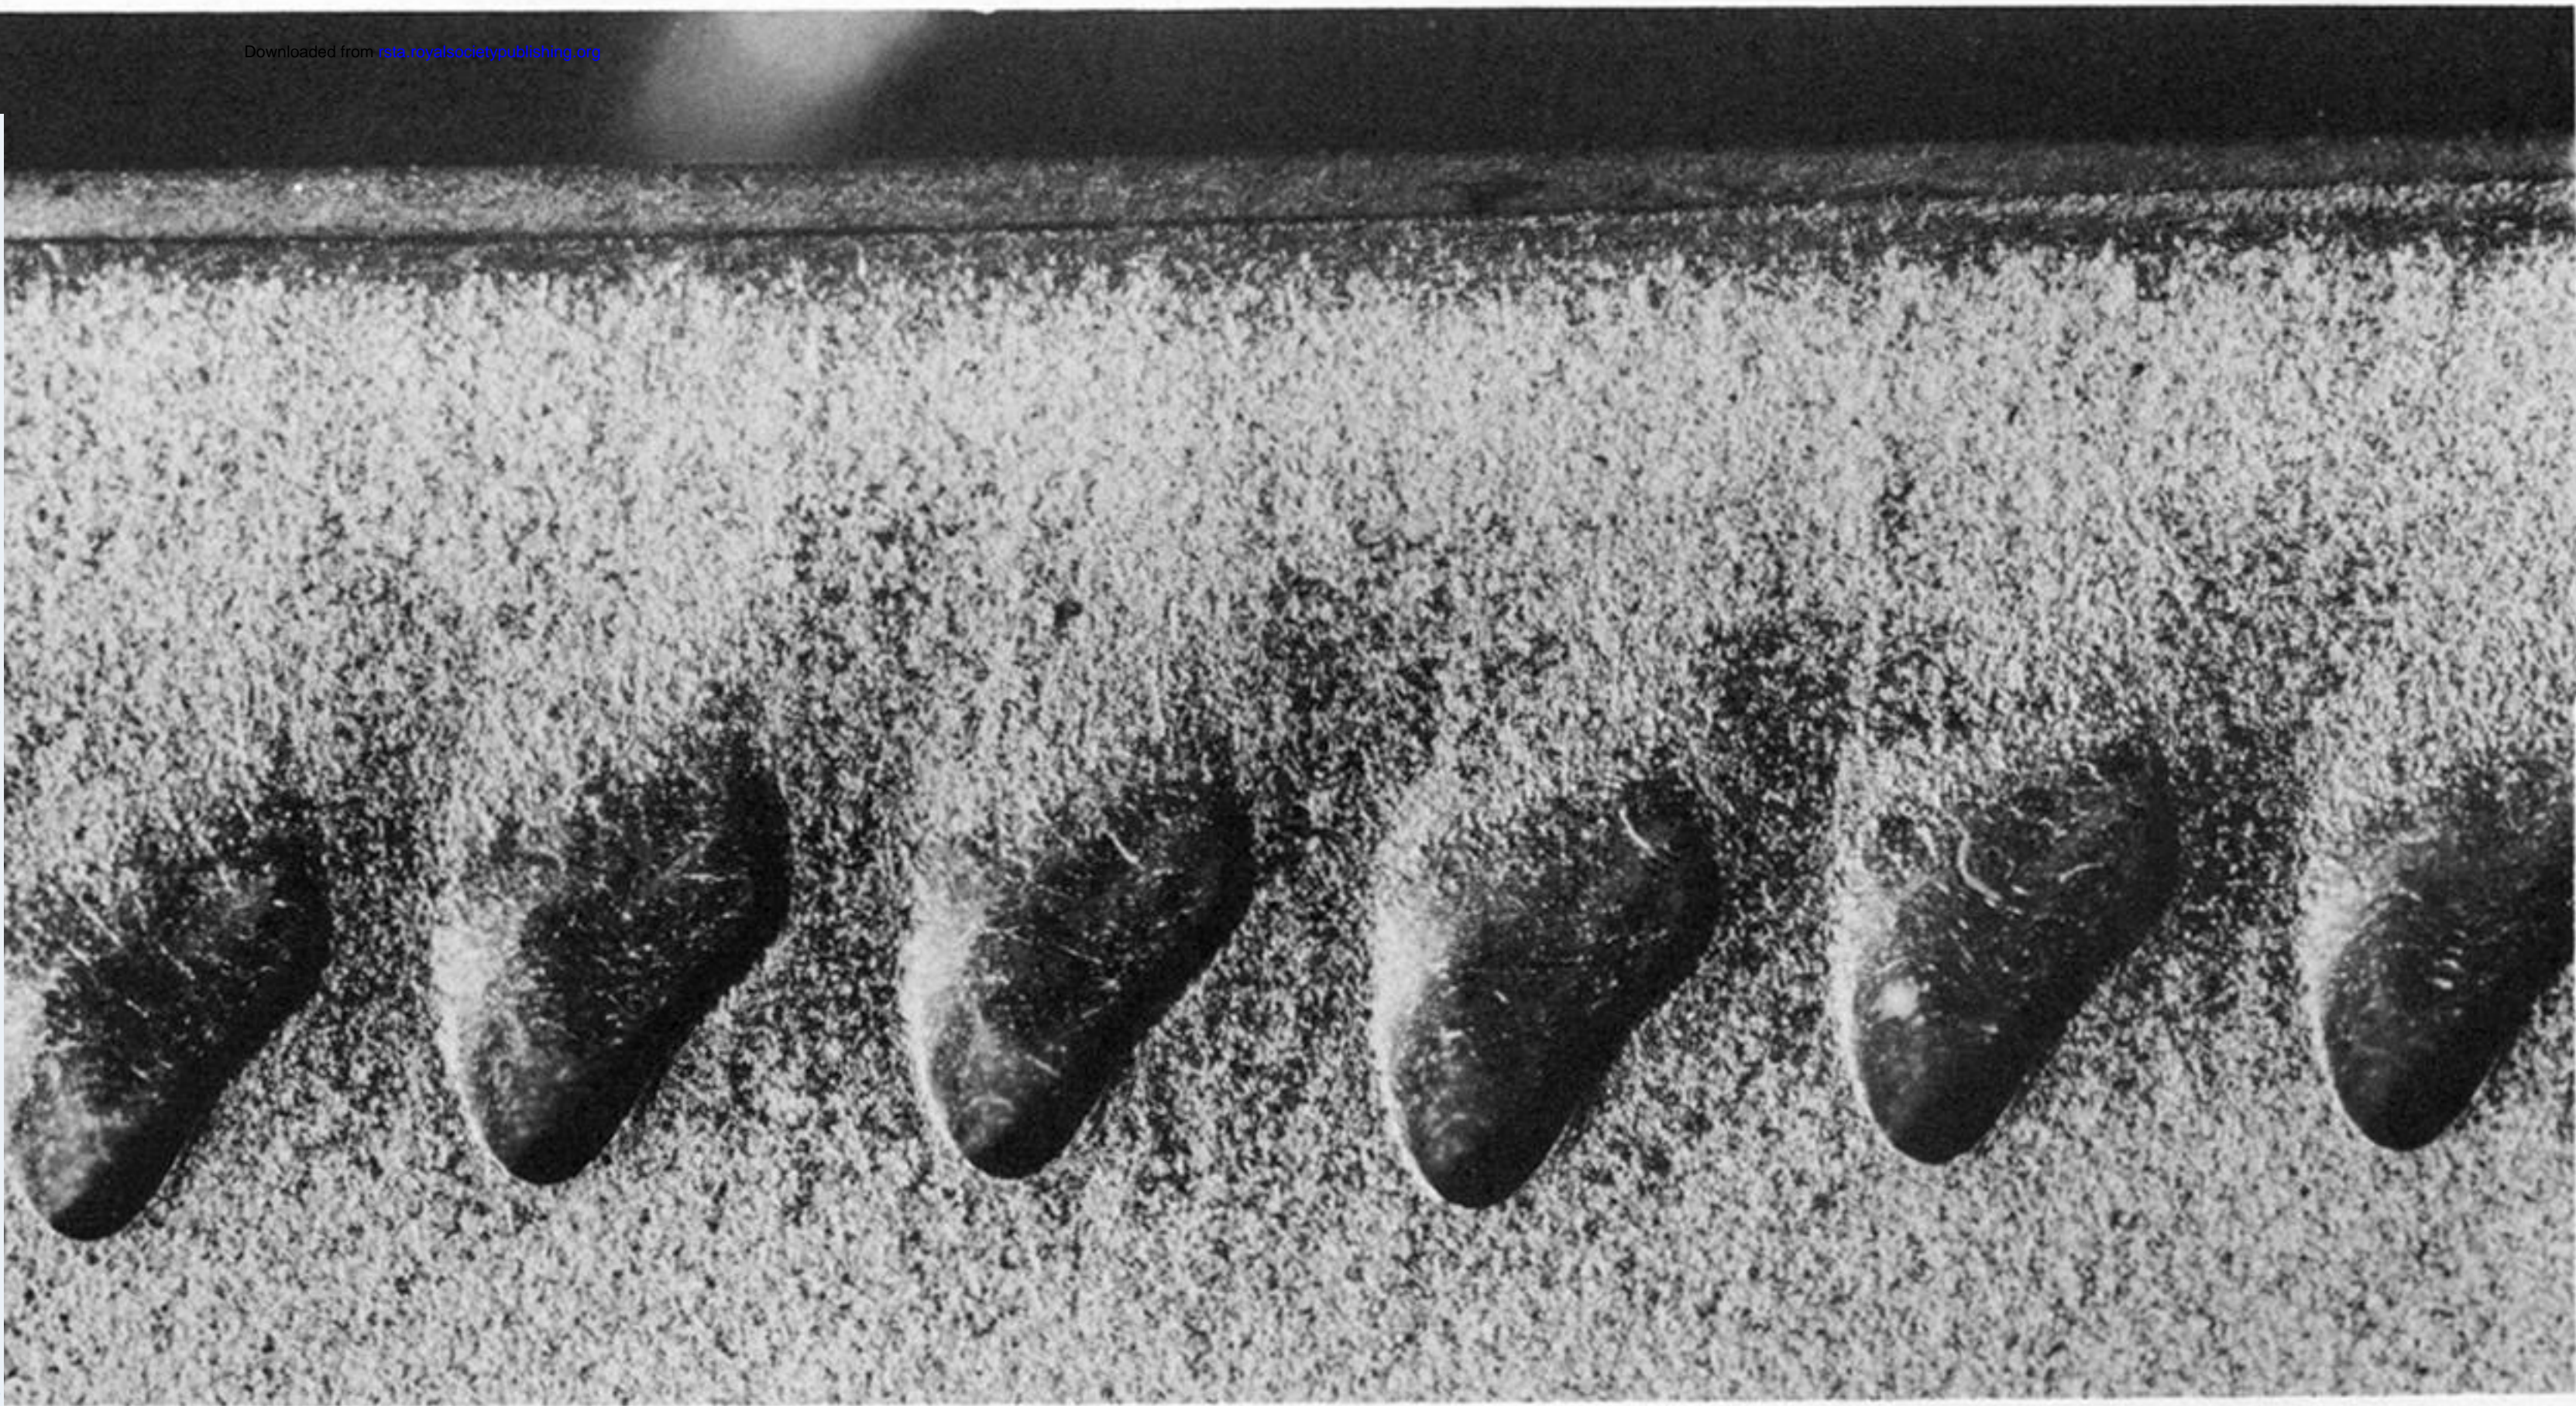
Contouring of hole at the surface for improved flow, by electrojet machining. (Magn.  $\times 13.5$ .)
